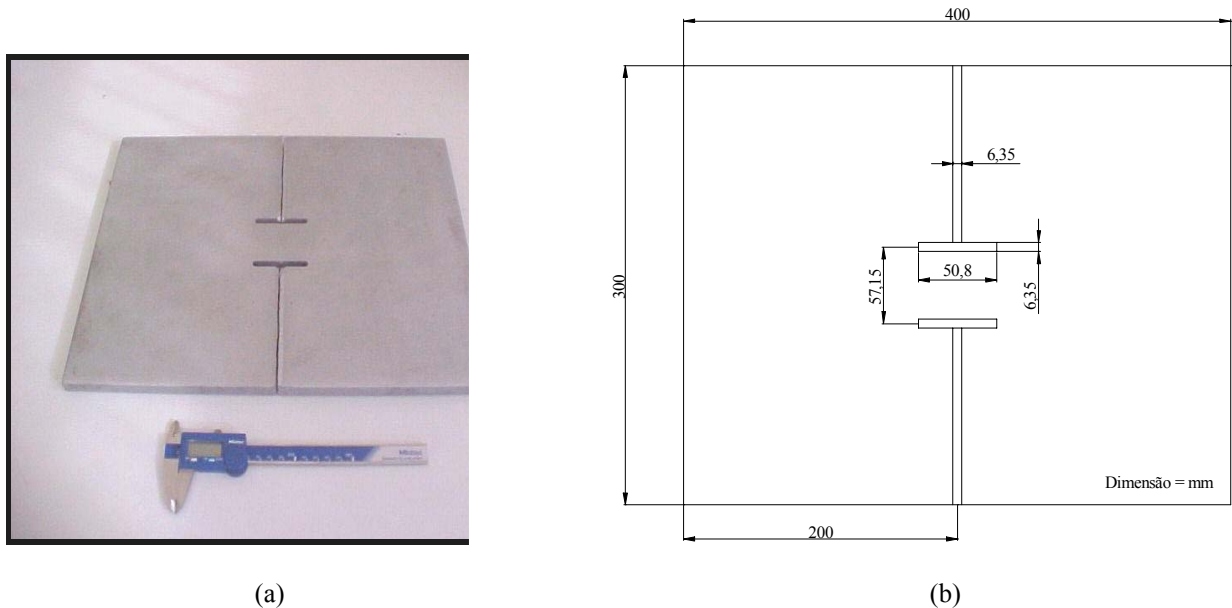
a) 5052 Aluminium plate; b) Final dimensions
